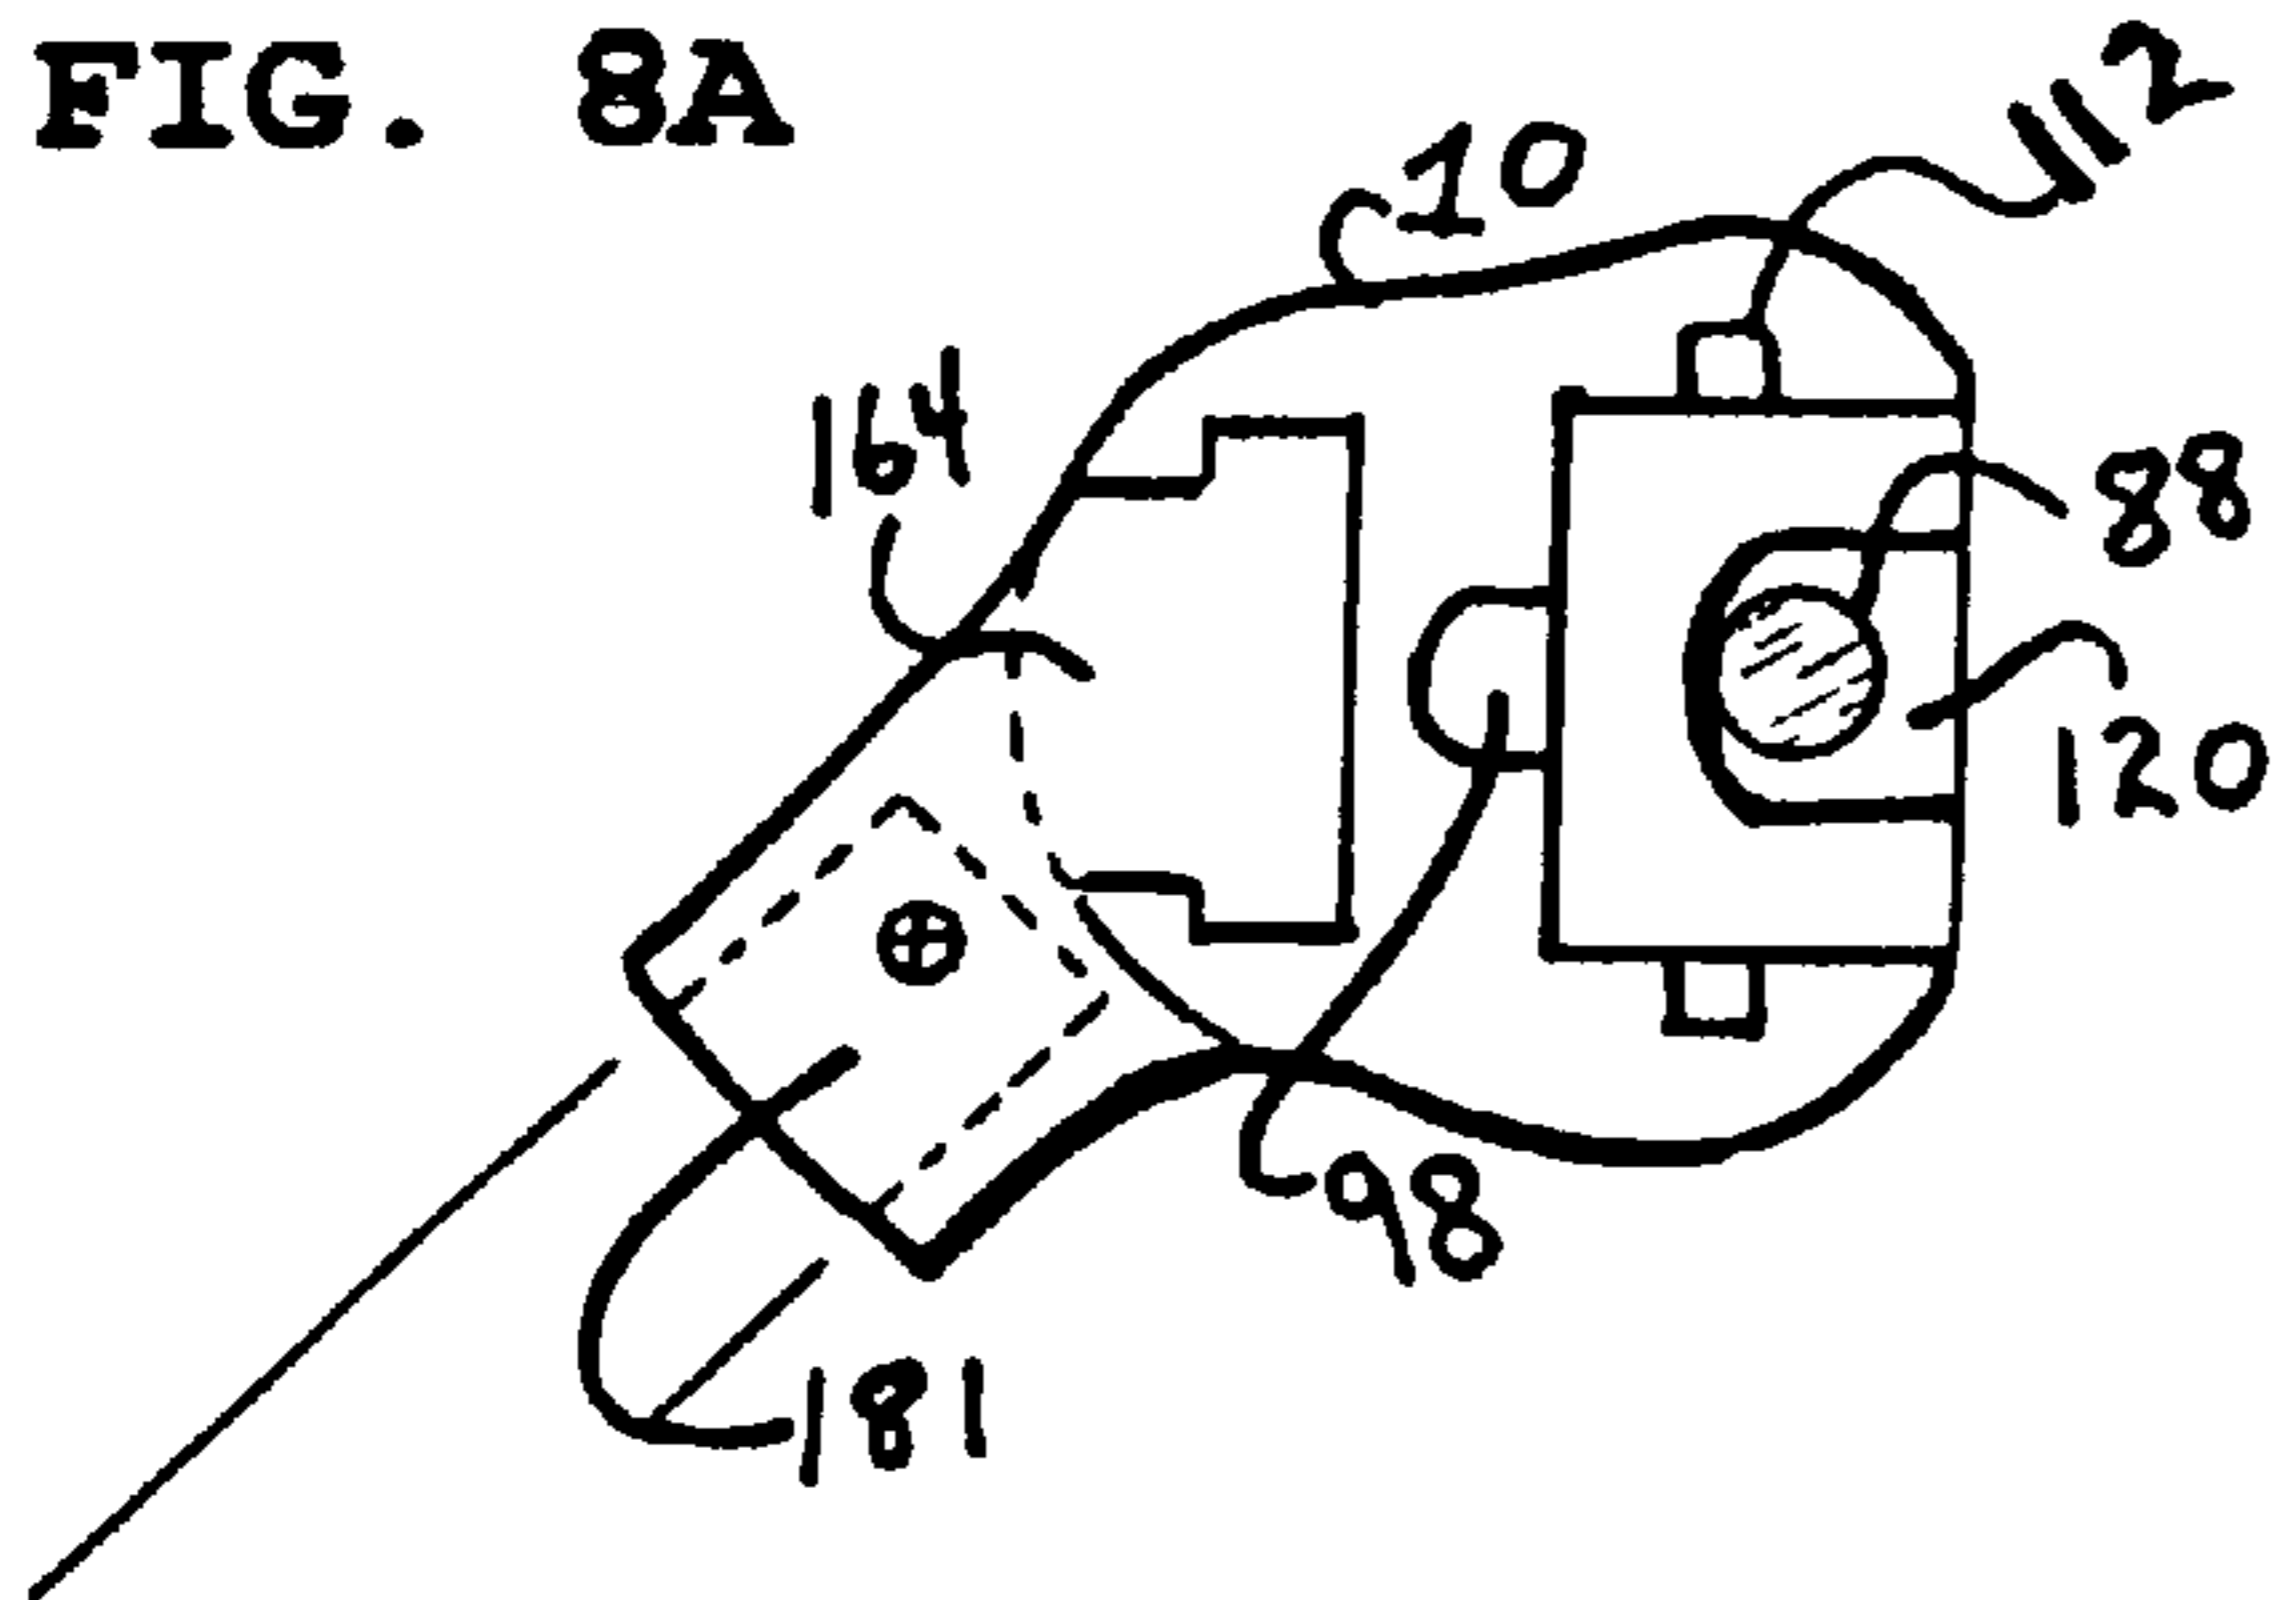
A End cross section view of main handle housing 10 and its composition sans swivel handle 22 and its components and sans release button 77.
